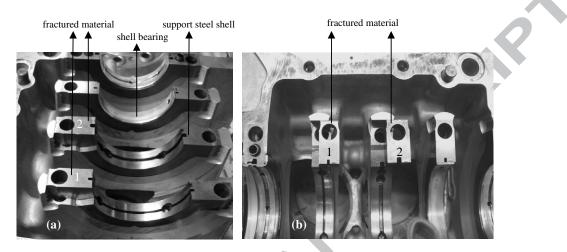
(a) Fractured samples (No.1 and No. 2) and (b) the same samples in detailed view.
